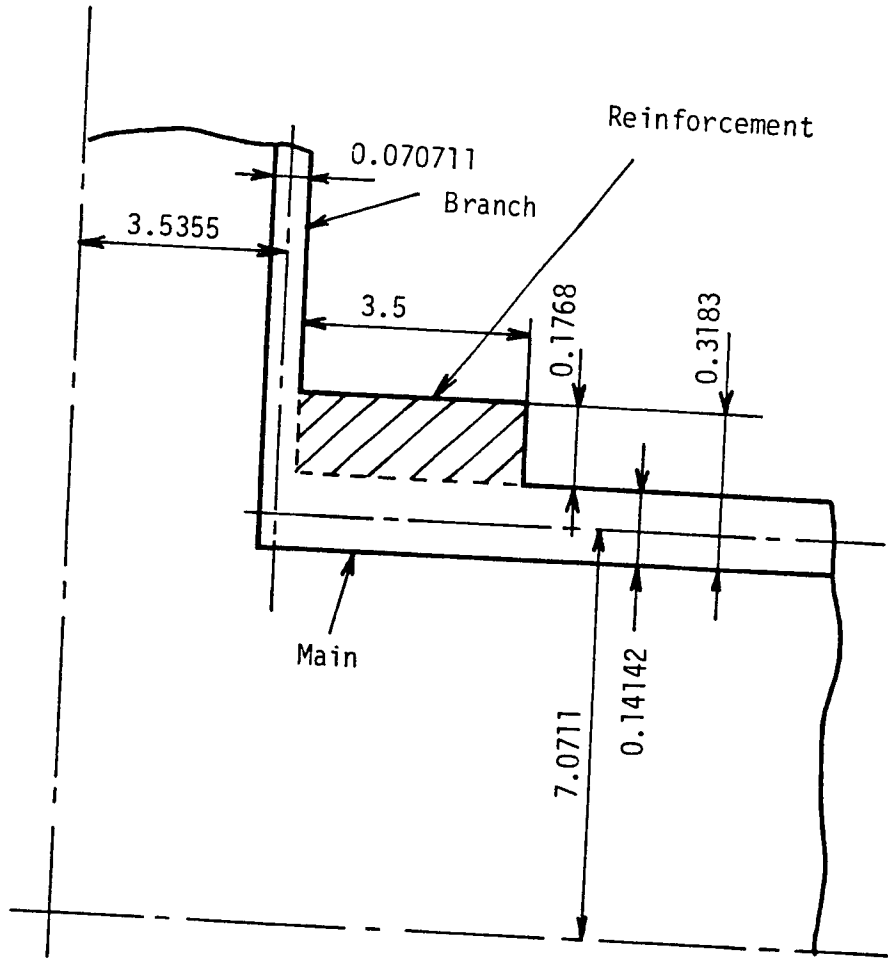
Reinforced Equal Strength Tee Branch Connection
